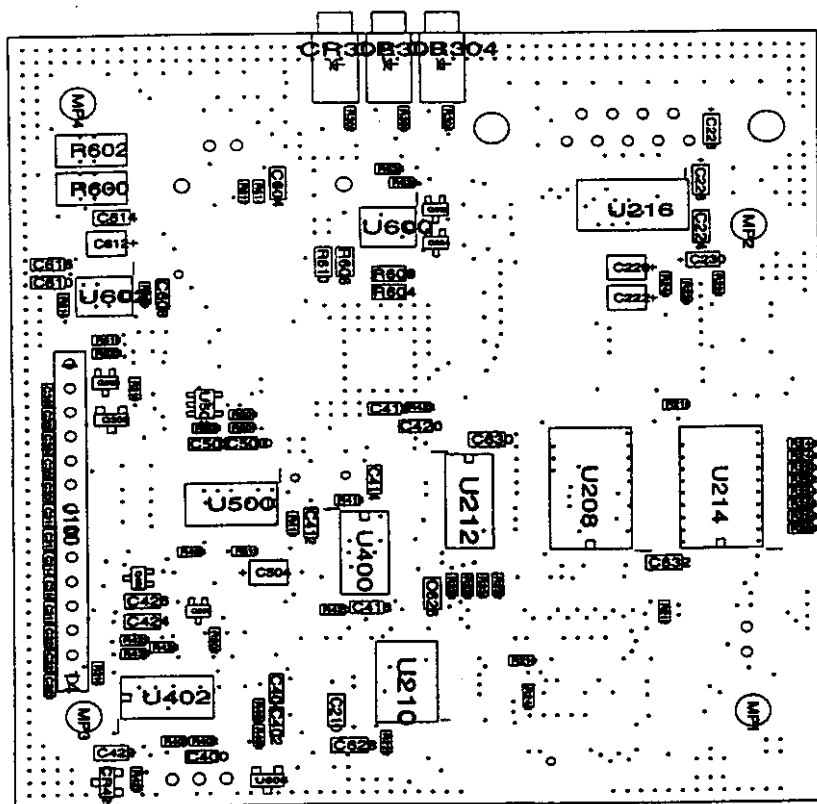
3286 Modem Board Component Layout (Bottom)
